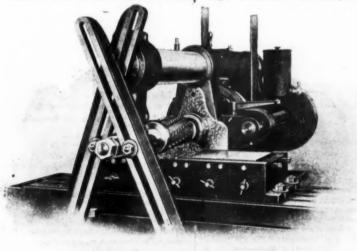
No. 3 PLAIN CINCINNATI MILLER TAKING A CUT3-22" DEEP ON PIECES \mathfrak{G}_2''' WIDE AT A FEED OF \mathfrak{F}_3''' PER MINUTE.
